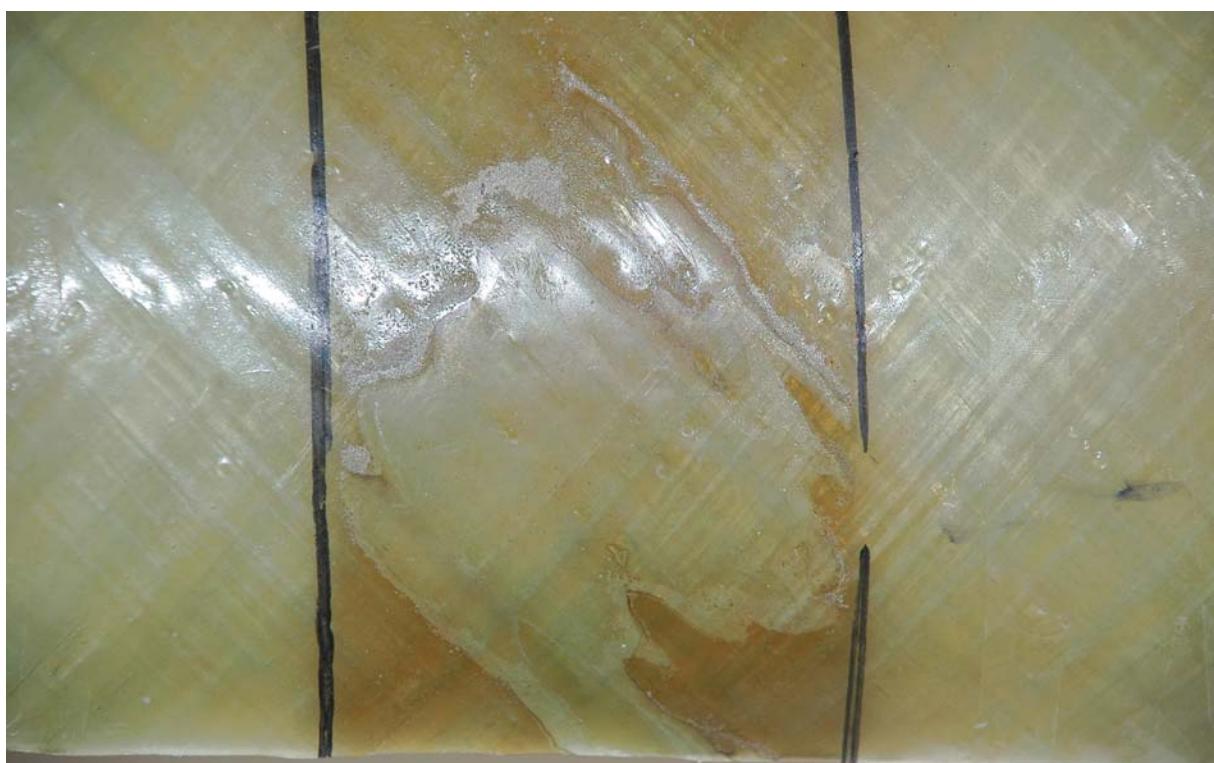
Detail of surface colouring in the clamp area, pipe section C
